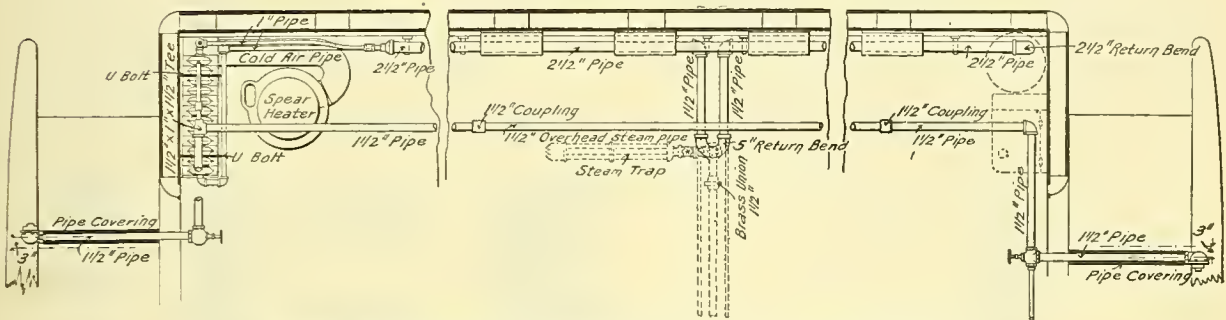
Plan of Heater, Pipes and Connections for Direct Steam-heating.
